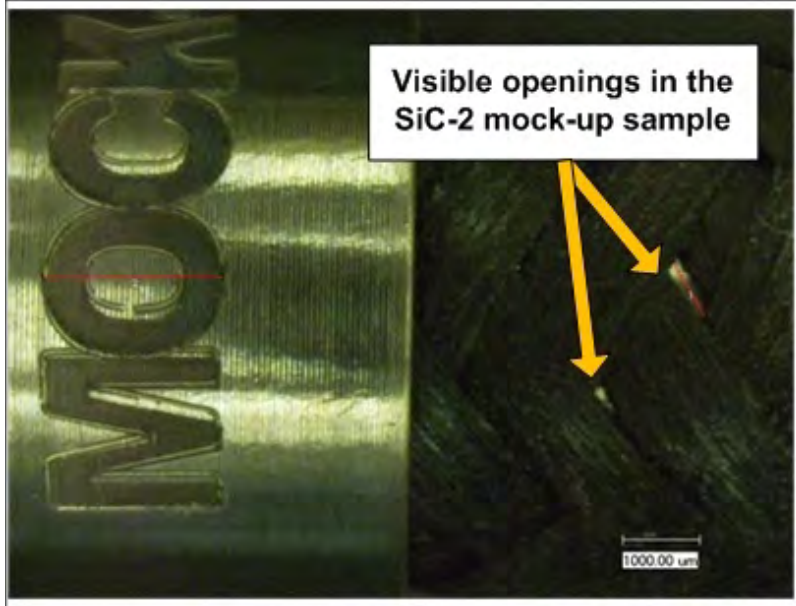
Open porosity is already visible prior to radiographic inspection with the naked eye on the SiC-2 mock-up sample.
